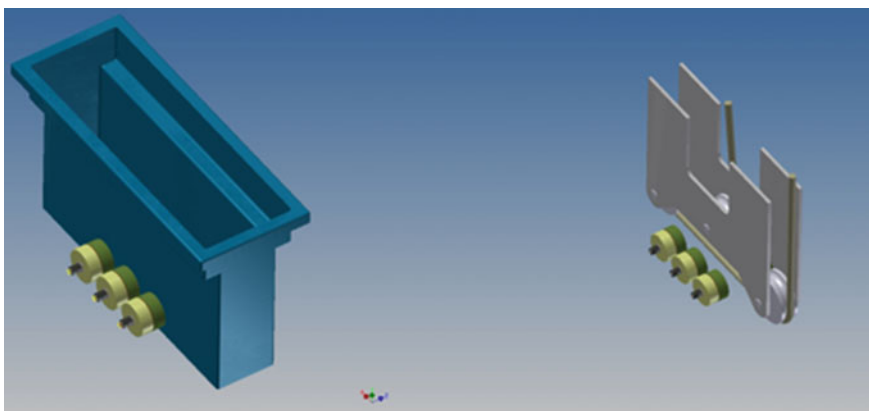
Left side CAD-design for the ultrasonic dip coating bath, right side rope guiding system, dip coating pan faded out
